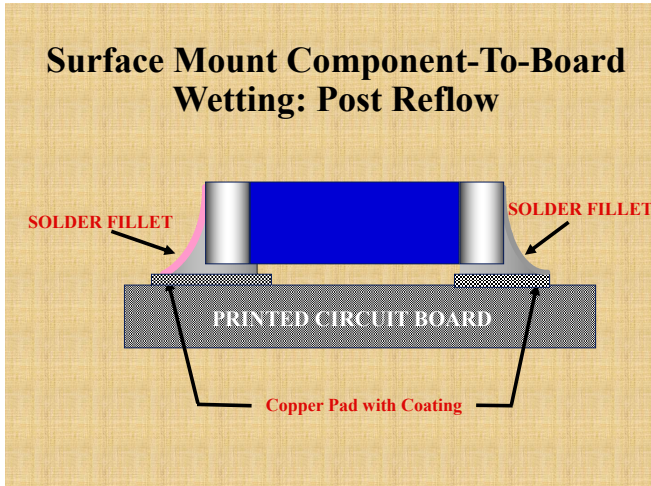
Solder Wetting on Surface Mounted Device. Good Concave, Low Wetting Angle Fillets
